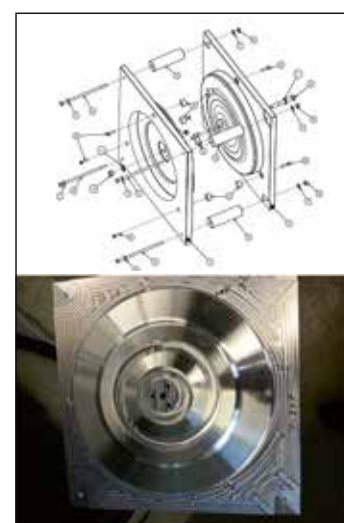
5-axis milled aluminium negative mould – WIWeB Erding
